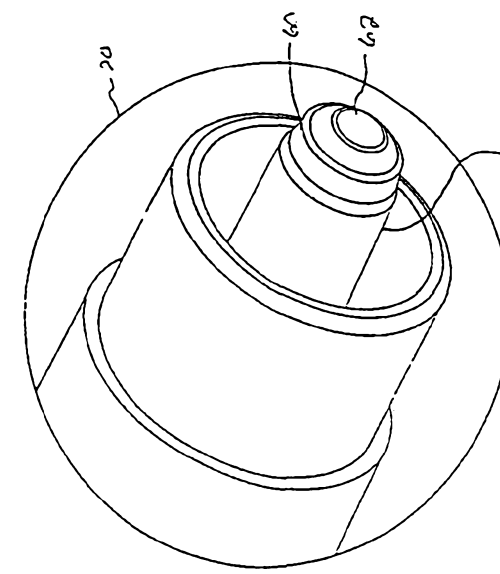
D SIDE VIEW - PLUNGER IN LOCKED POSITION
